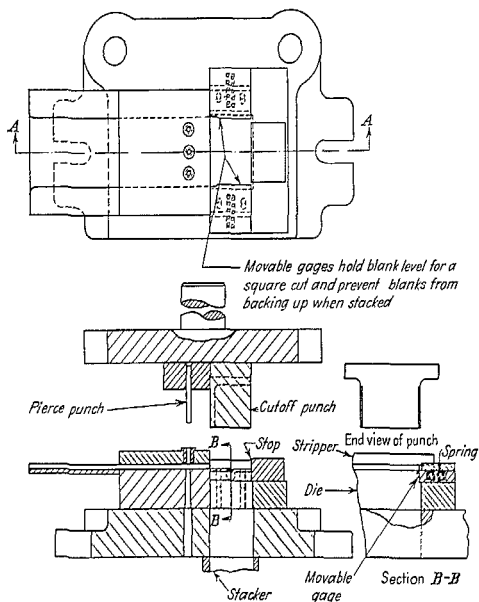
Movable gages position and stack blanks. (Stanley Works.)
